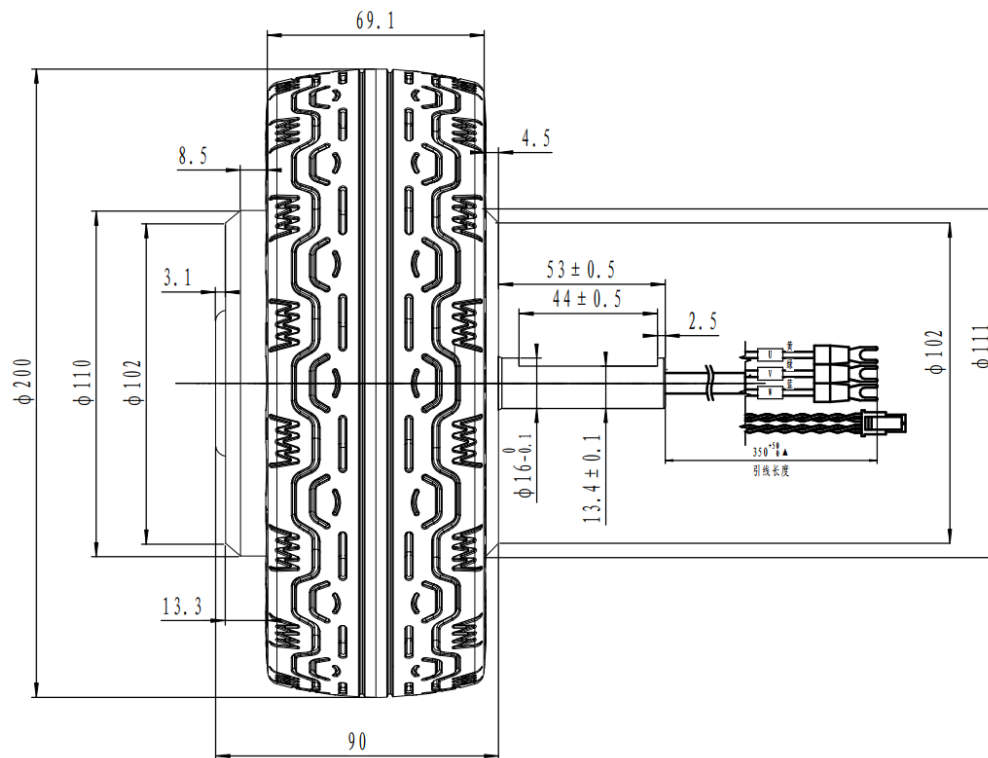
8 inch 15 Nm hub motor mounting size
